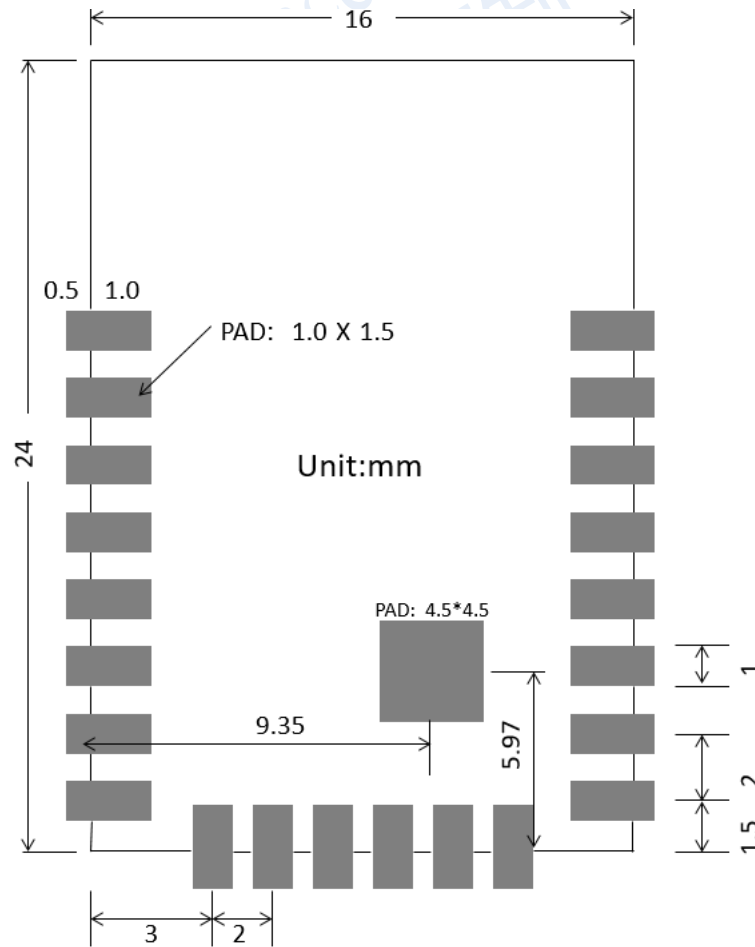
PCB Layout for ESPC5-12 (Top view)
